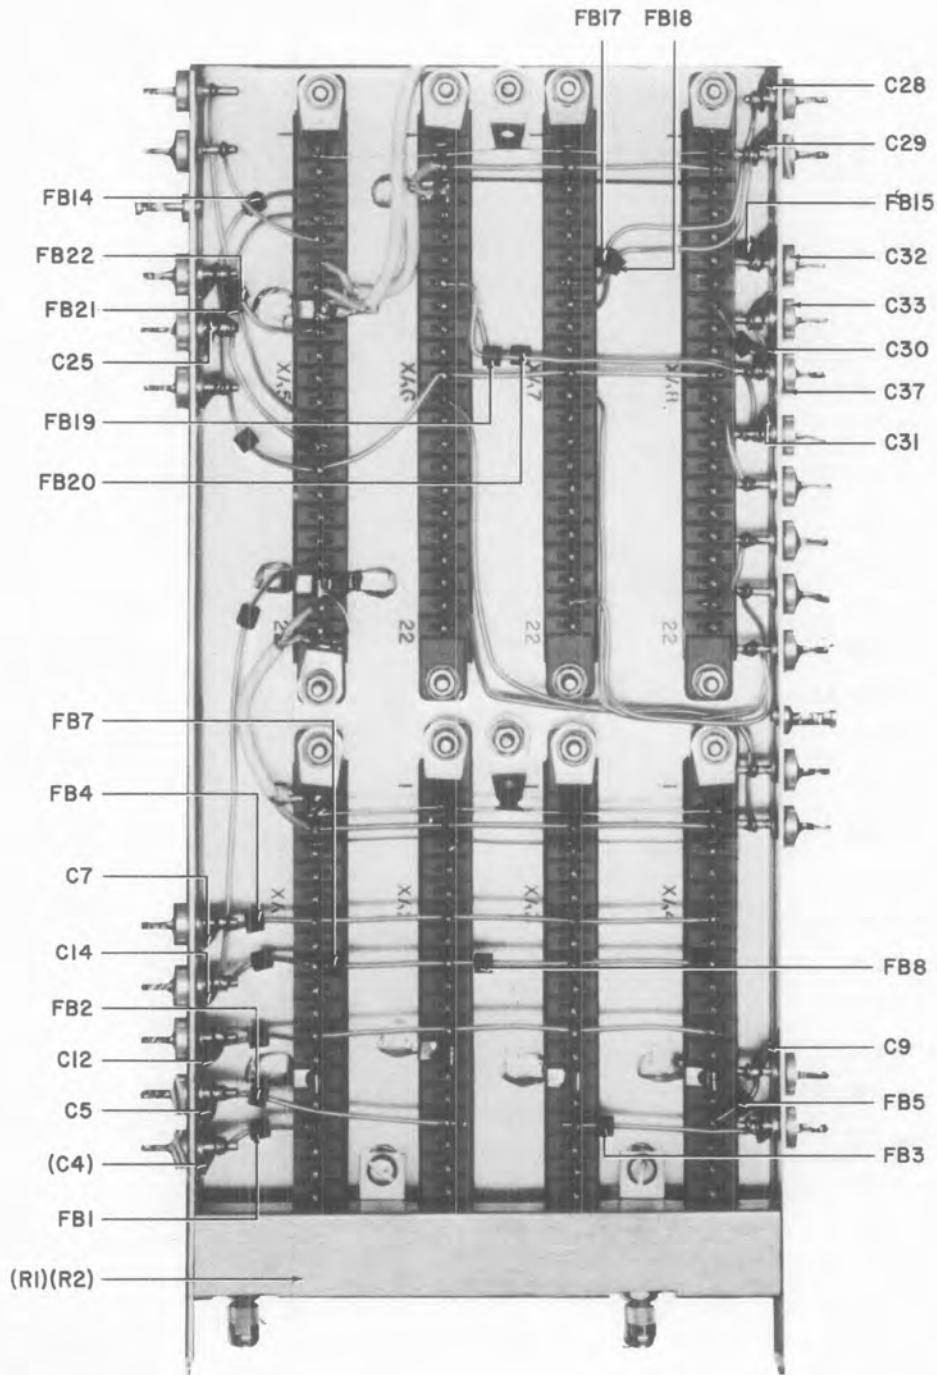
Type 72346 IF Amplifier Assembly (A2), Bottom View, Component Locations
